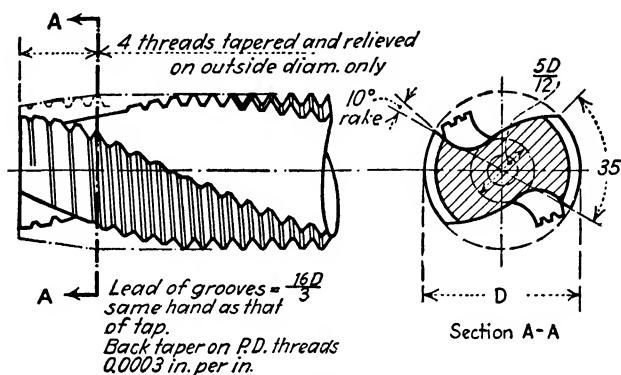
Close tolerance tapping is best done with a helical-fluted tap.
